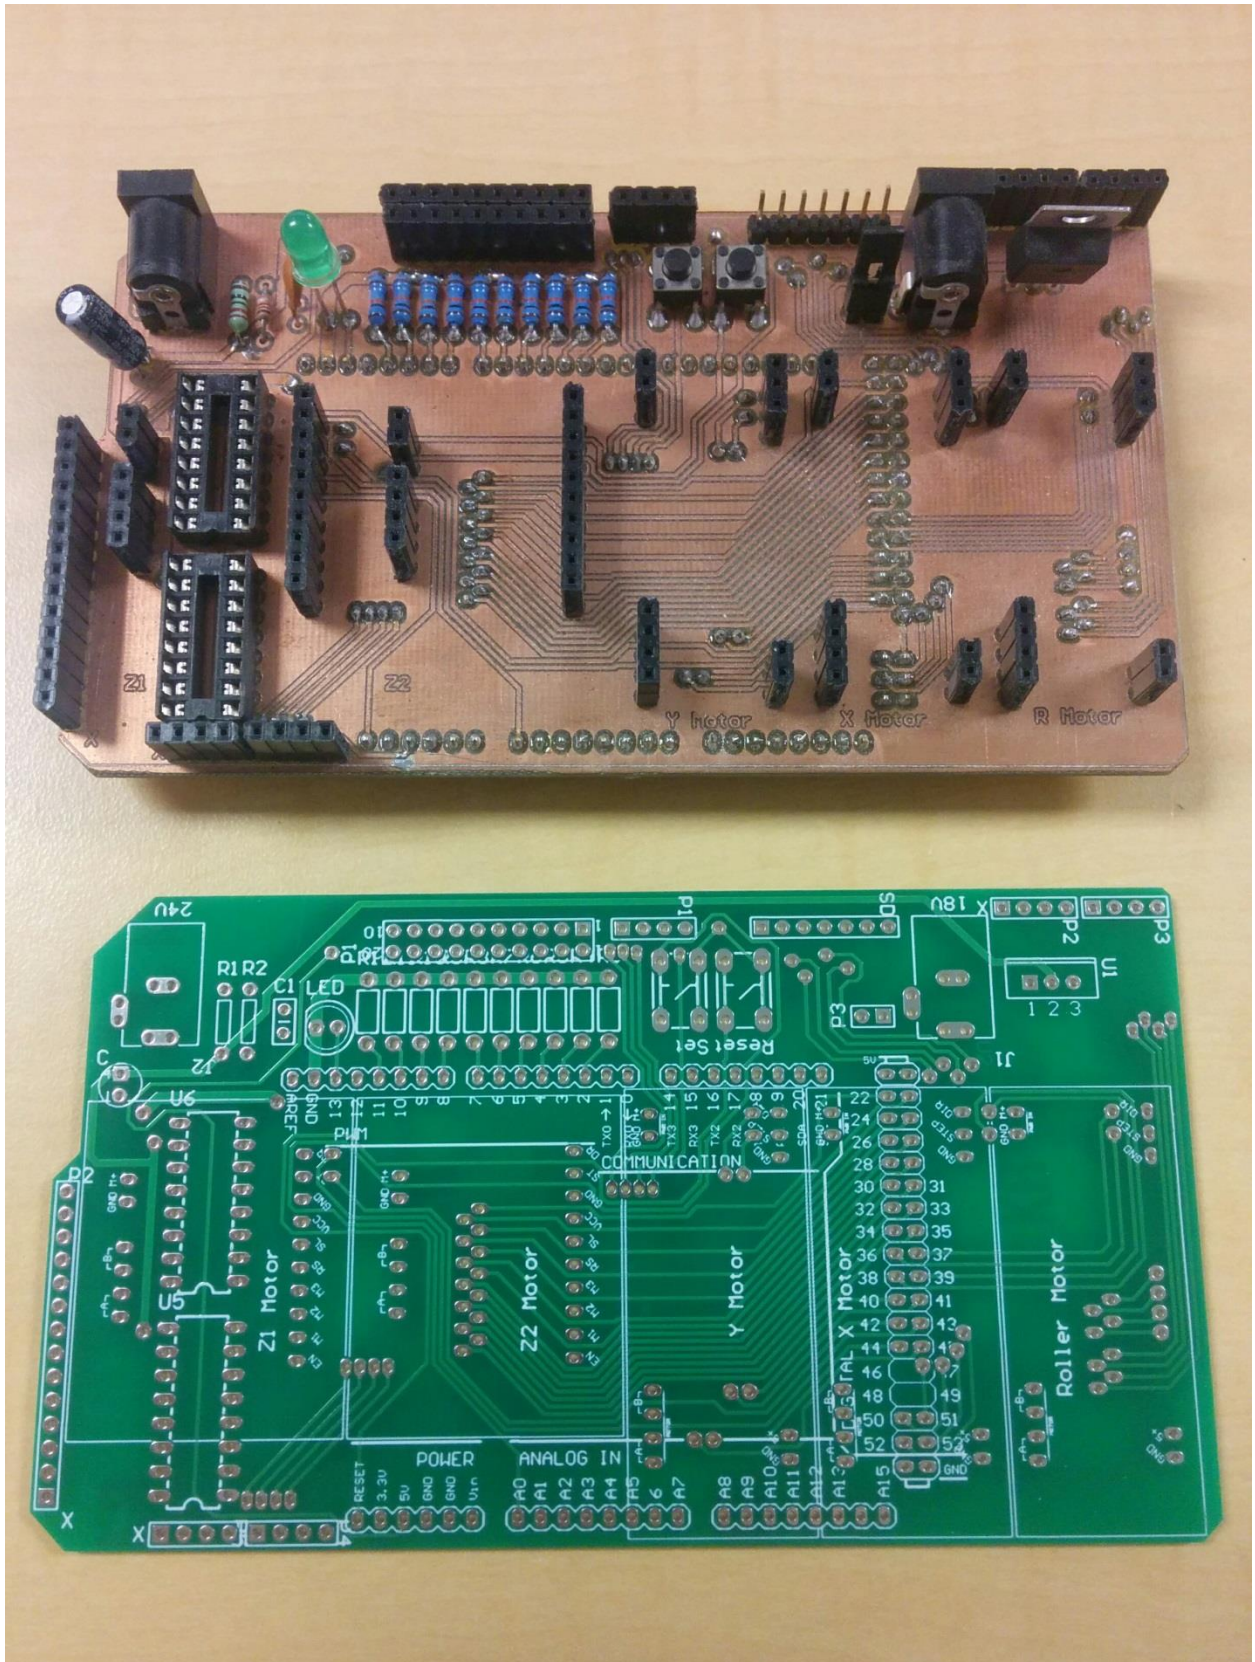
Final PCB design prototype and professionally manufactured PCB
